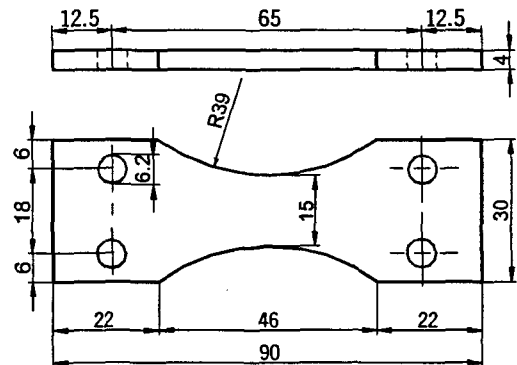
Geometry and dimensions of fatigue test specimen (unit : mm)
